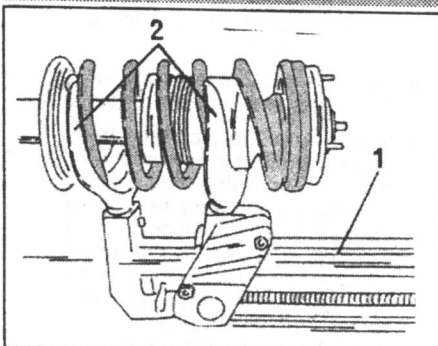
The spring compressor (1) can be clamped into a vice. The claws (2) are placed around the coils of the spring.
